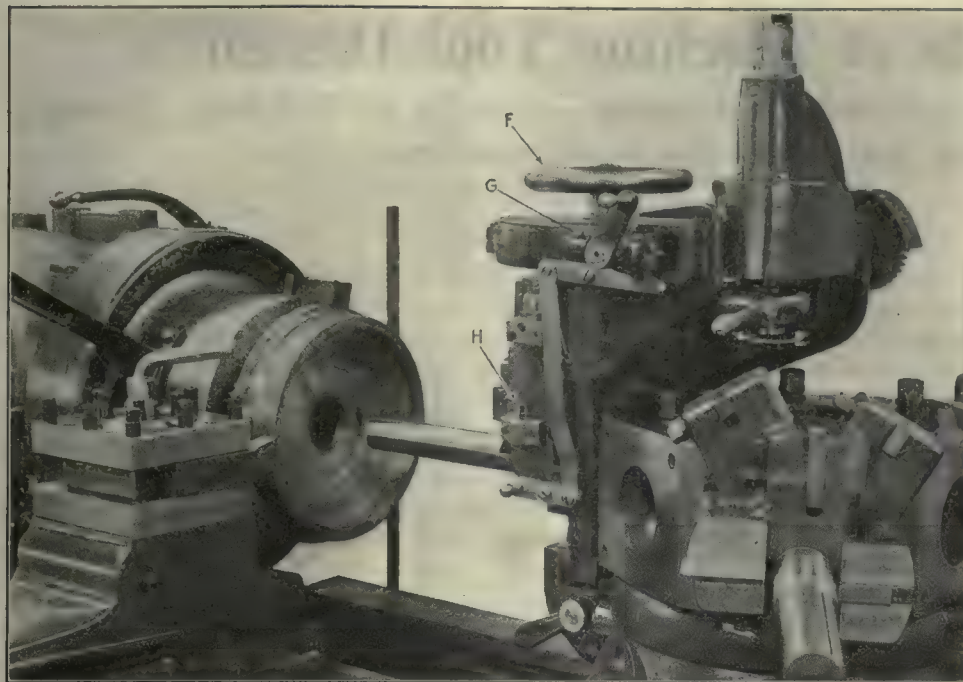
TOOLS IN POSITION FOR FIRST OPERATION
